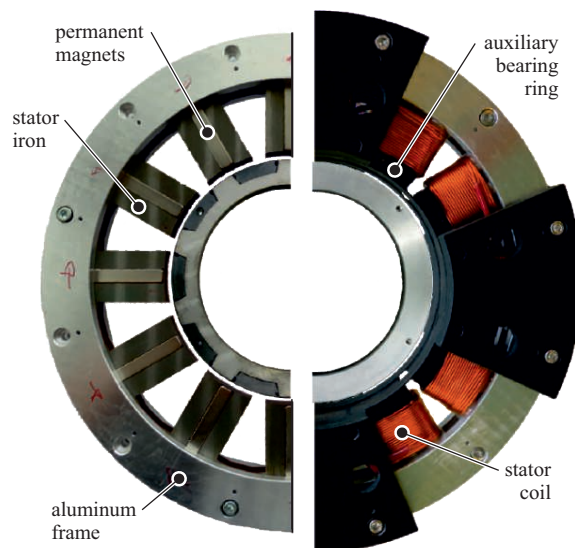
Stator of the bearingless flux-switching slice motor prototype without coils (left) and fully assembled (right).
